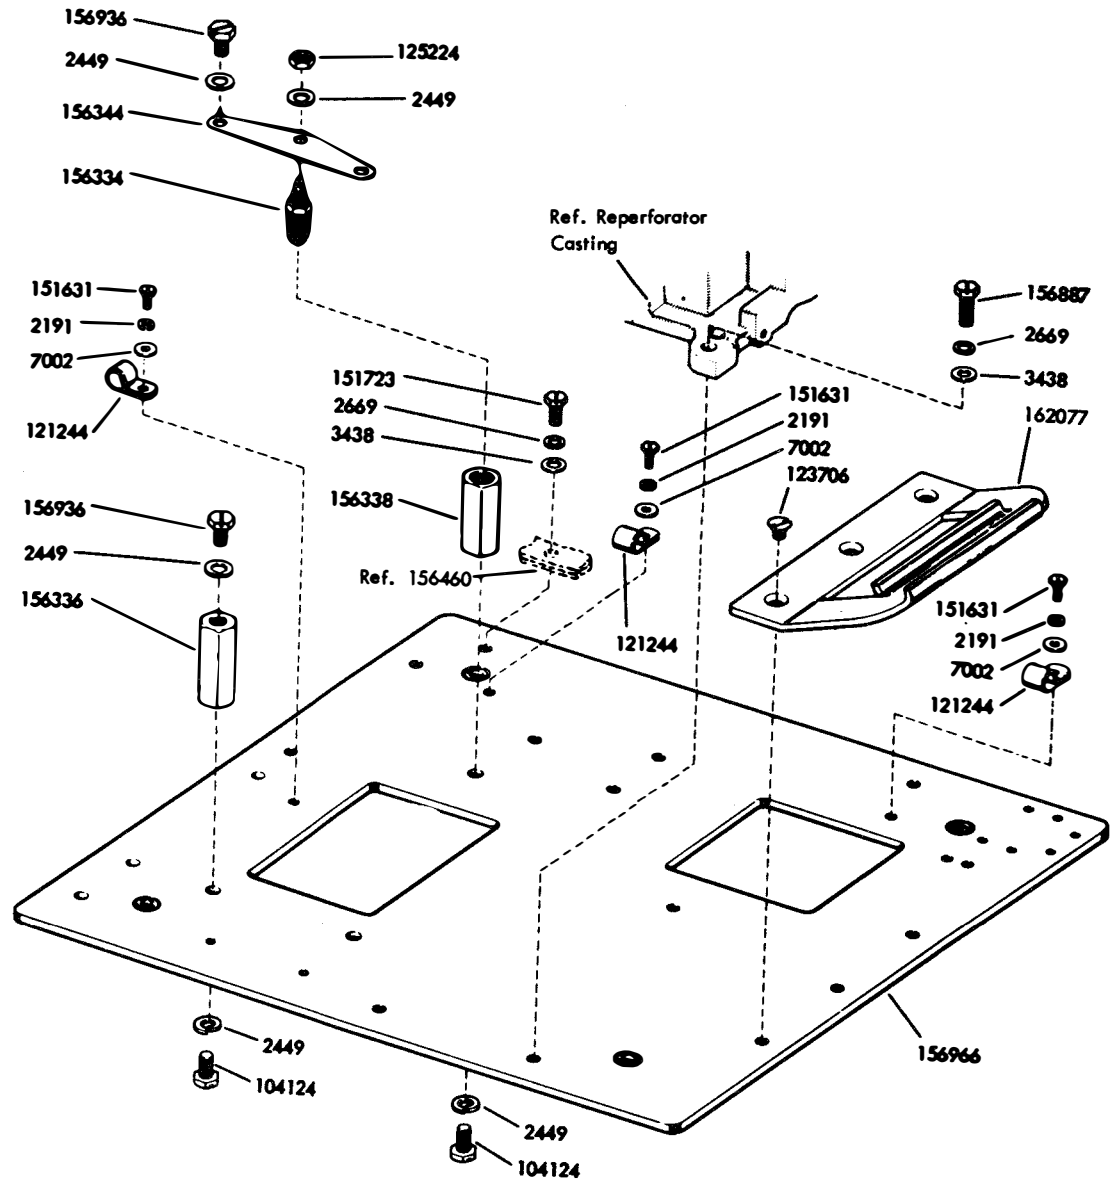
Reperforator Base - Single-Plate (Sheet 2 of 2)
